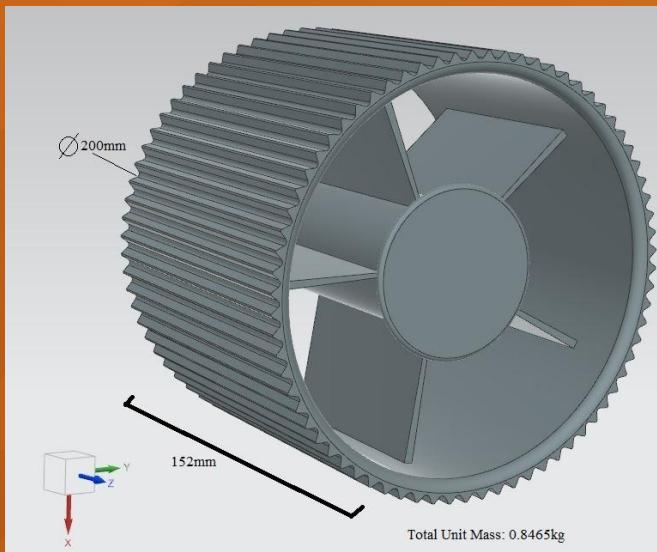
Wheel design with dimensions and mass of 0.8465kg each
